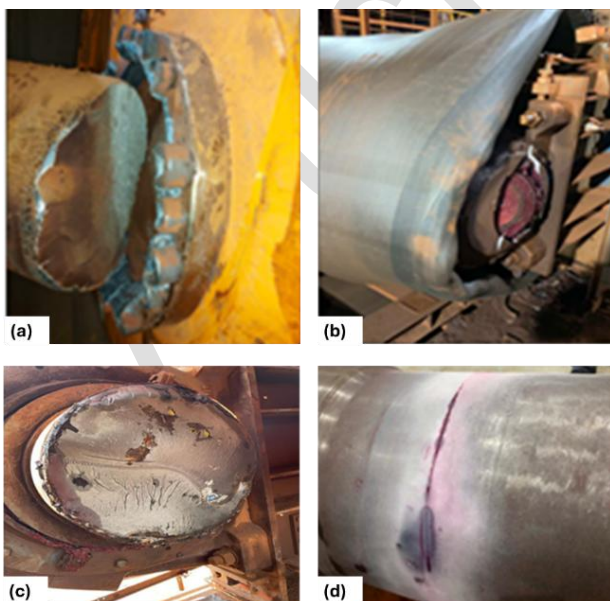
(a) and (c) Example of fractured shaft of the conveyor pulley, (b) belt misalignment after fractured shaft and (c) selected shaft for failure analysis.
